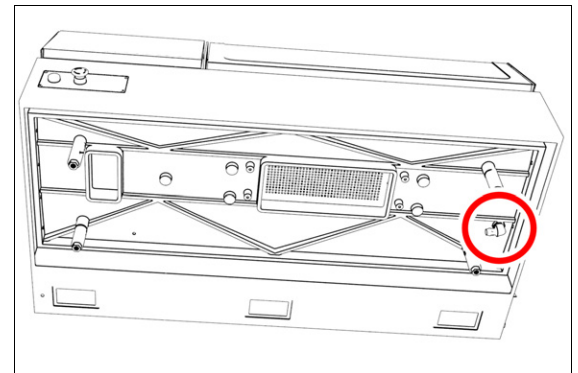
Coolant tube fitting on the bottom of the machine.
